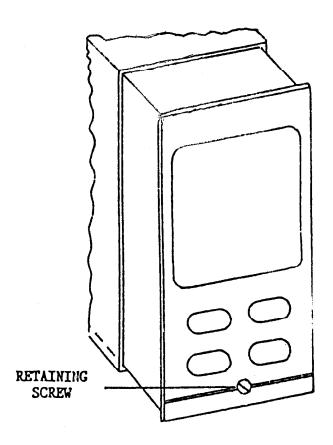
REMOVAL AND REPLACEMENT OF 3400 WITHIN HOUSING
